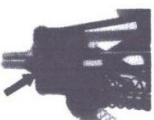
Placing these spacers to the rear of the hub carriers will shorten your wheelbase (because it slides your axle closer together); to the front will lengthen your wheelbase
